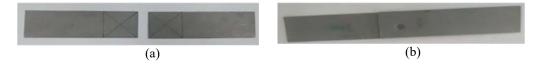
Material sheet (a) before spot welding and (b) after spot welding
